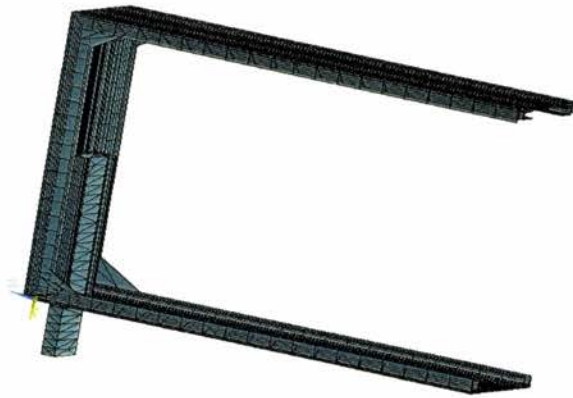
Assembled model of the frame of 50"x144" board
